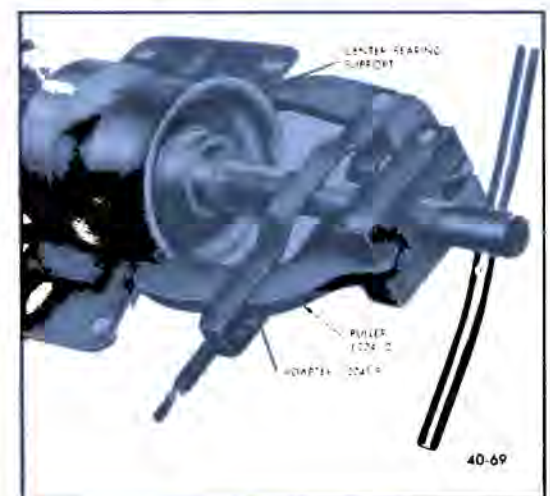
Removing Center Support and Bearing, 45-46-48000
